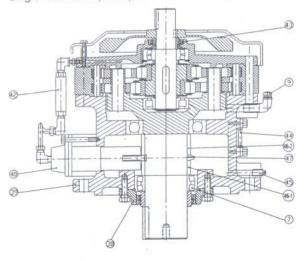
Fig. C Type THHM (Horizontal Gearmotor) Single Reduction (Example: Frame xize 622)
